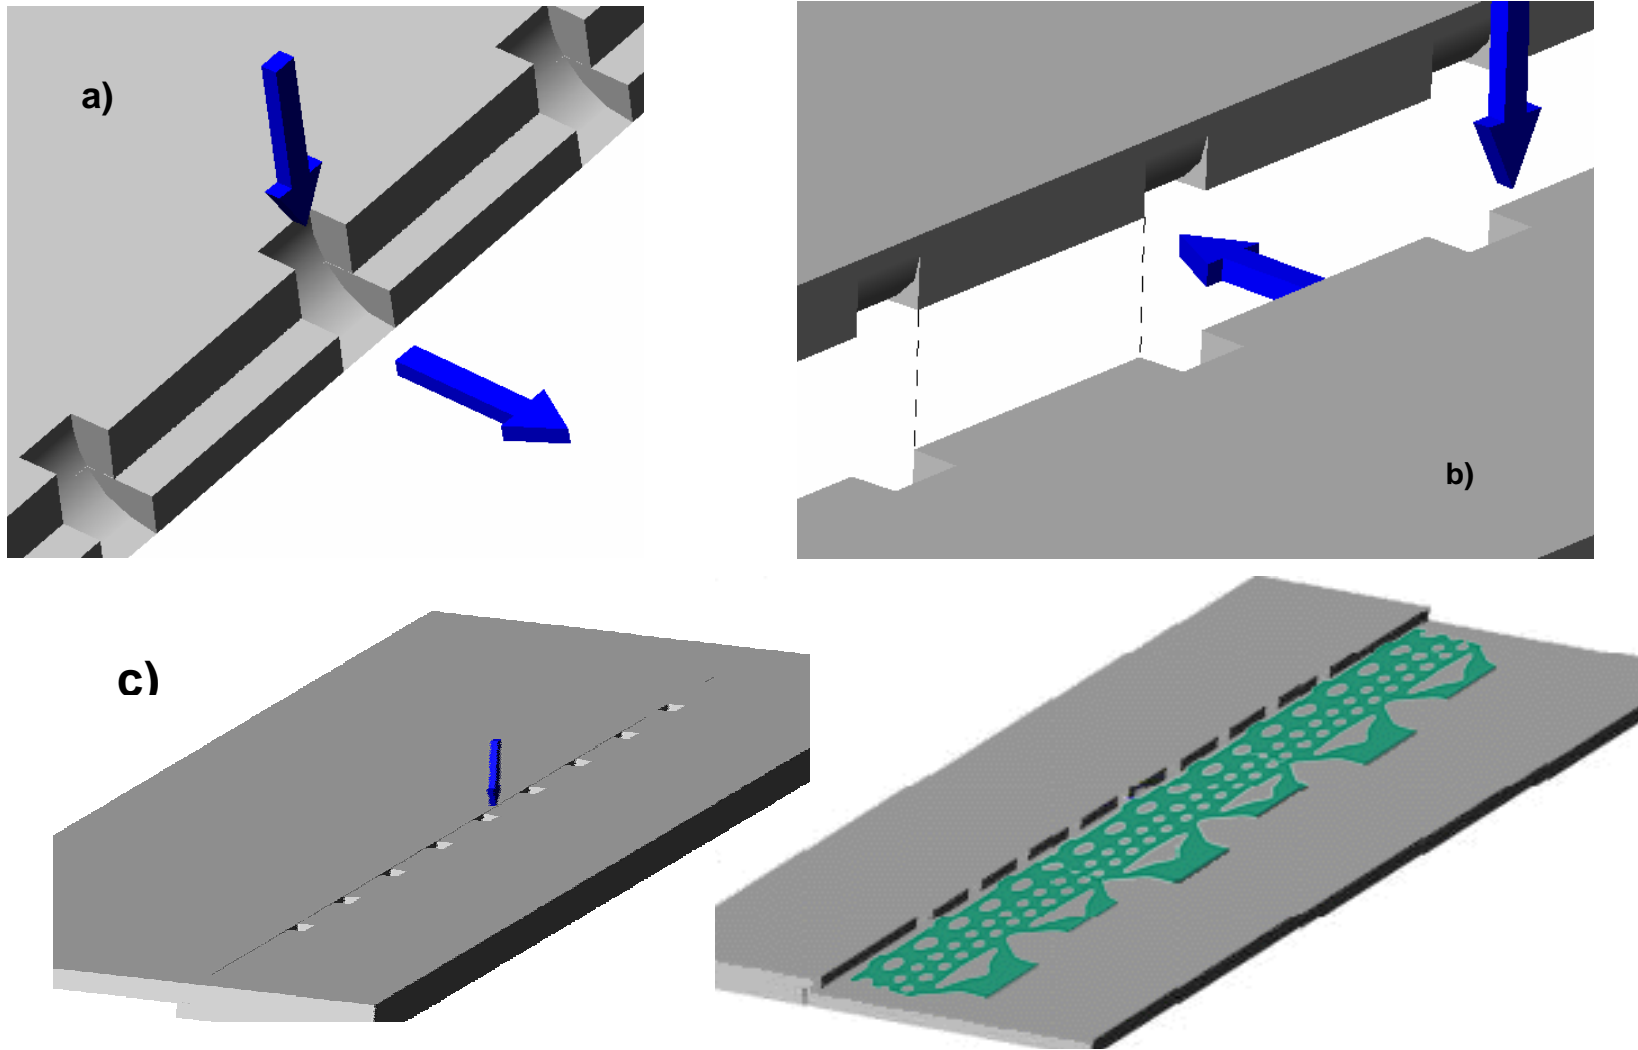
a) Concave inlet bend piece is shown, the coolant enters from the feed plenum and exits into the microcircuit b) convex inlet bend piece, shown above the concave piece c) completed inlet bend part from top (left) and bottom (right).
